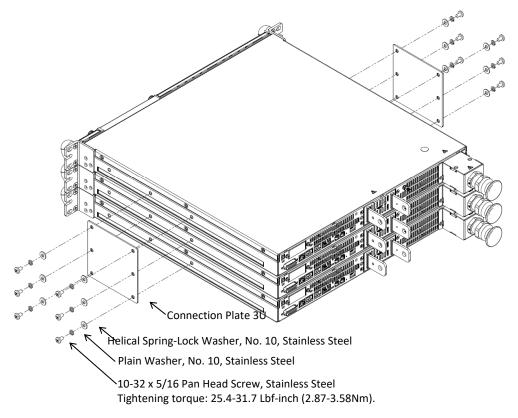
Three 60V-100V Units Connection Plates 3U Assembly
